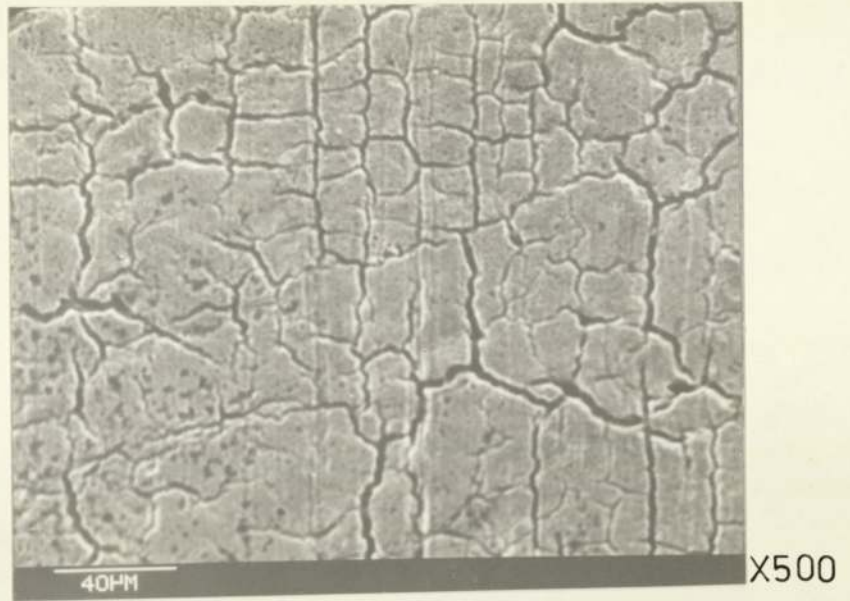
Parallel grinding cracks on the surface of a hardened and tempered No.5 die after 1000 cycles hot forging.
